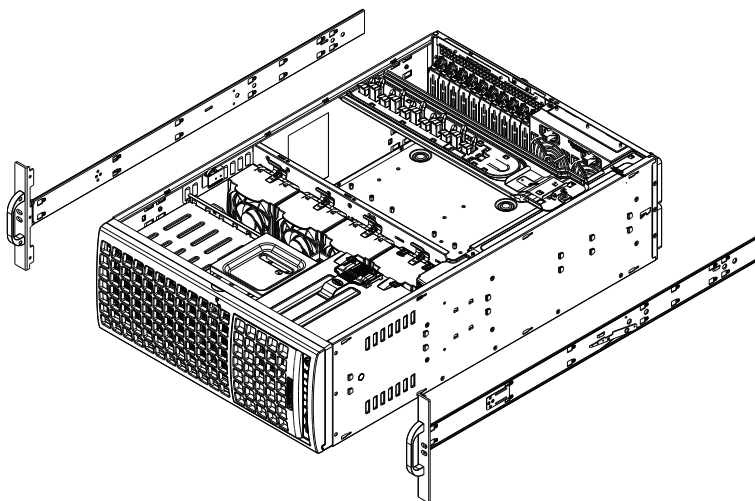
Identifying the Inner Rails and Chassis Handles
